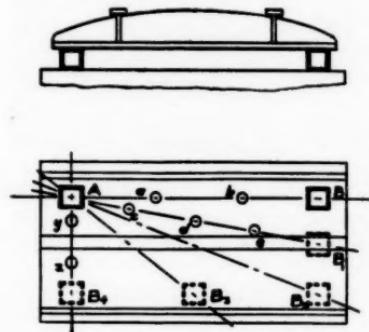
Checking flatness of table by straight-edge, slip gauge, and internal feeler.
